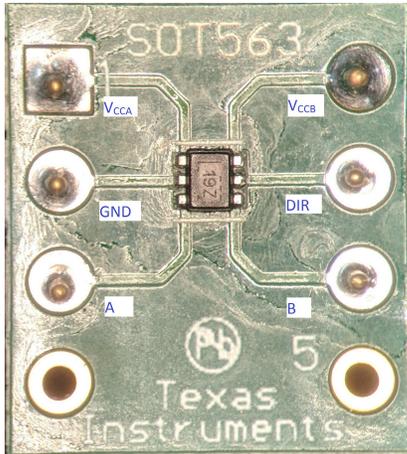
Soldered SN74AXC1T45DRL (Microscope Image)
